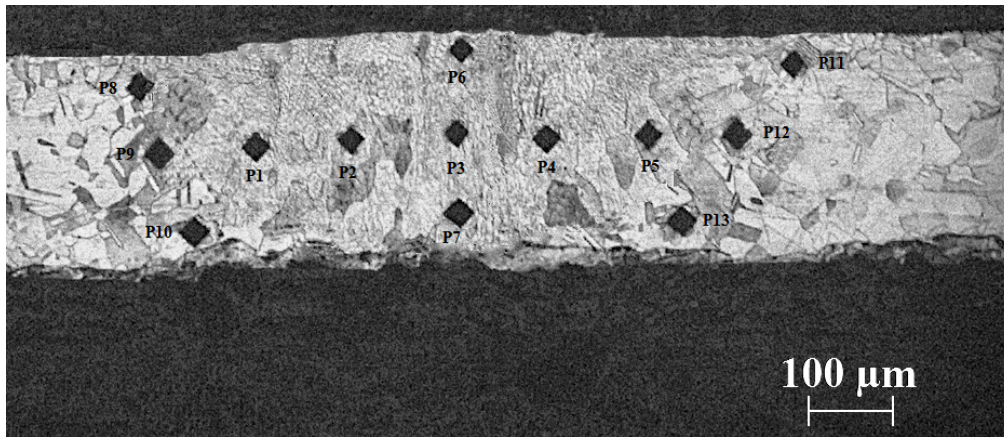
Hardness specimen with indentation marks (post welding heat treated sample).
